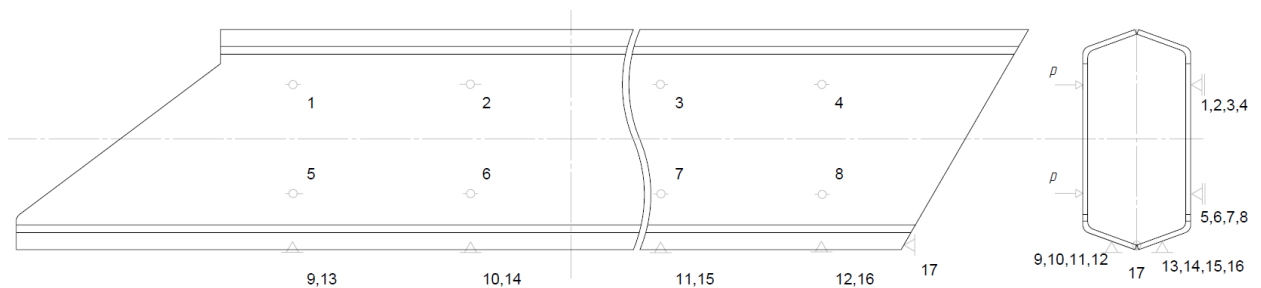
Schematic diagram of the device for the assembly and welding of the box.
